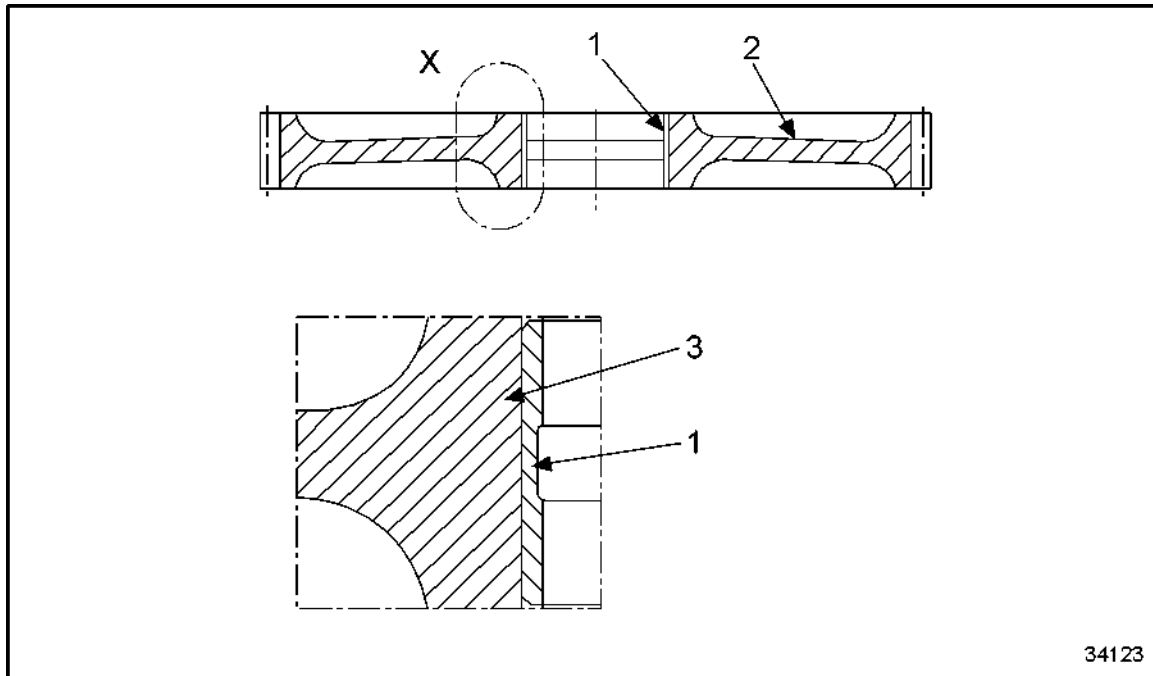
Measuring Bearing Diameter on Idler Gear Hubs
